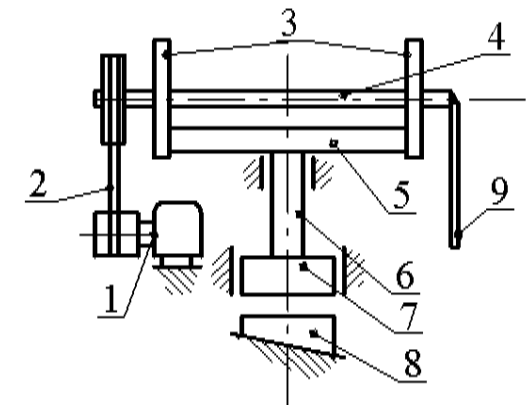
Friction (fly)-press: 1- electric motor; 2- belt transmission; 3- friction plate; 4- shaft; 5- flywheel; 6- screw; 7- slider; 8- bad; 9- operation lever
